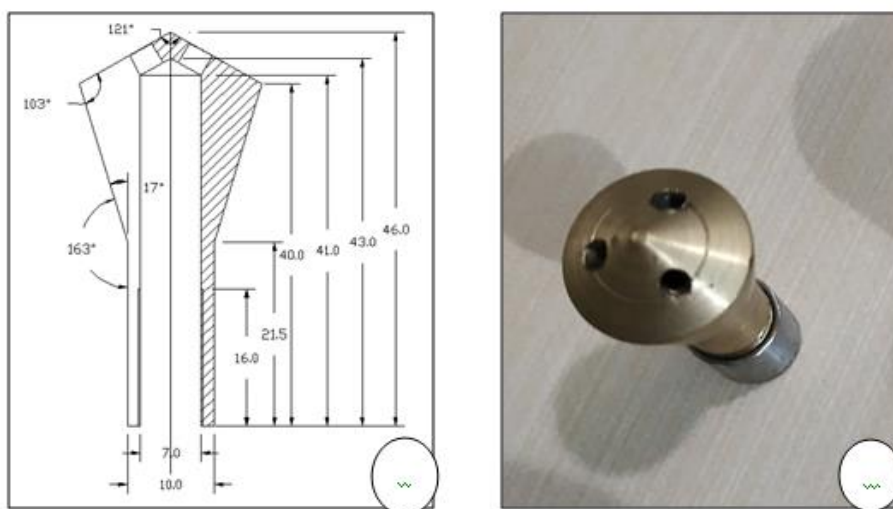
The bluff-body construction (a) flame holder design (dimensions in mm), (b) flame holder photo.
